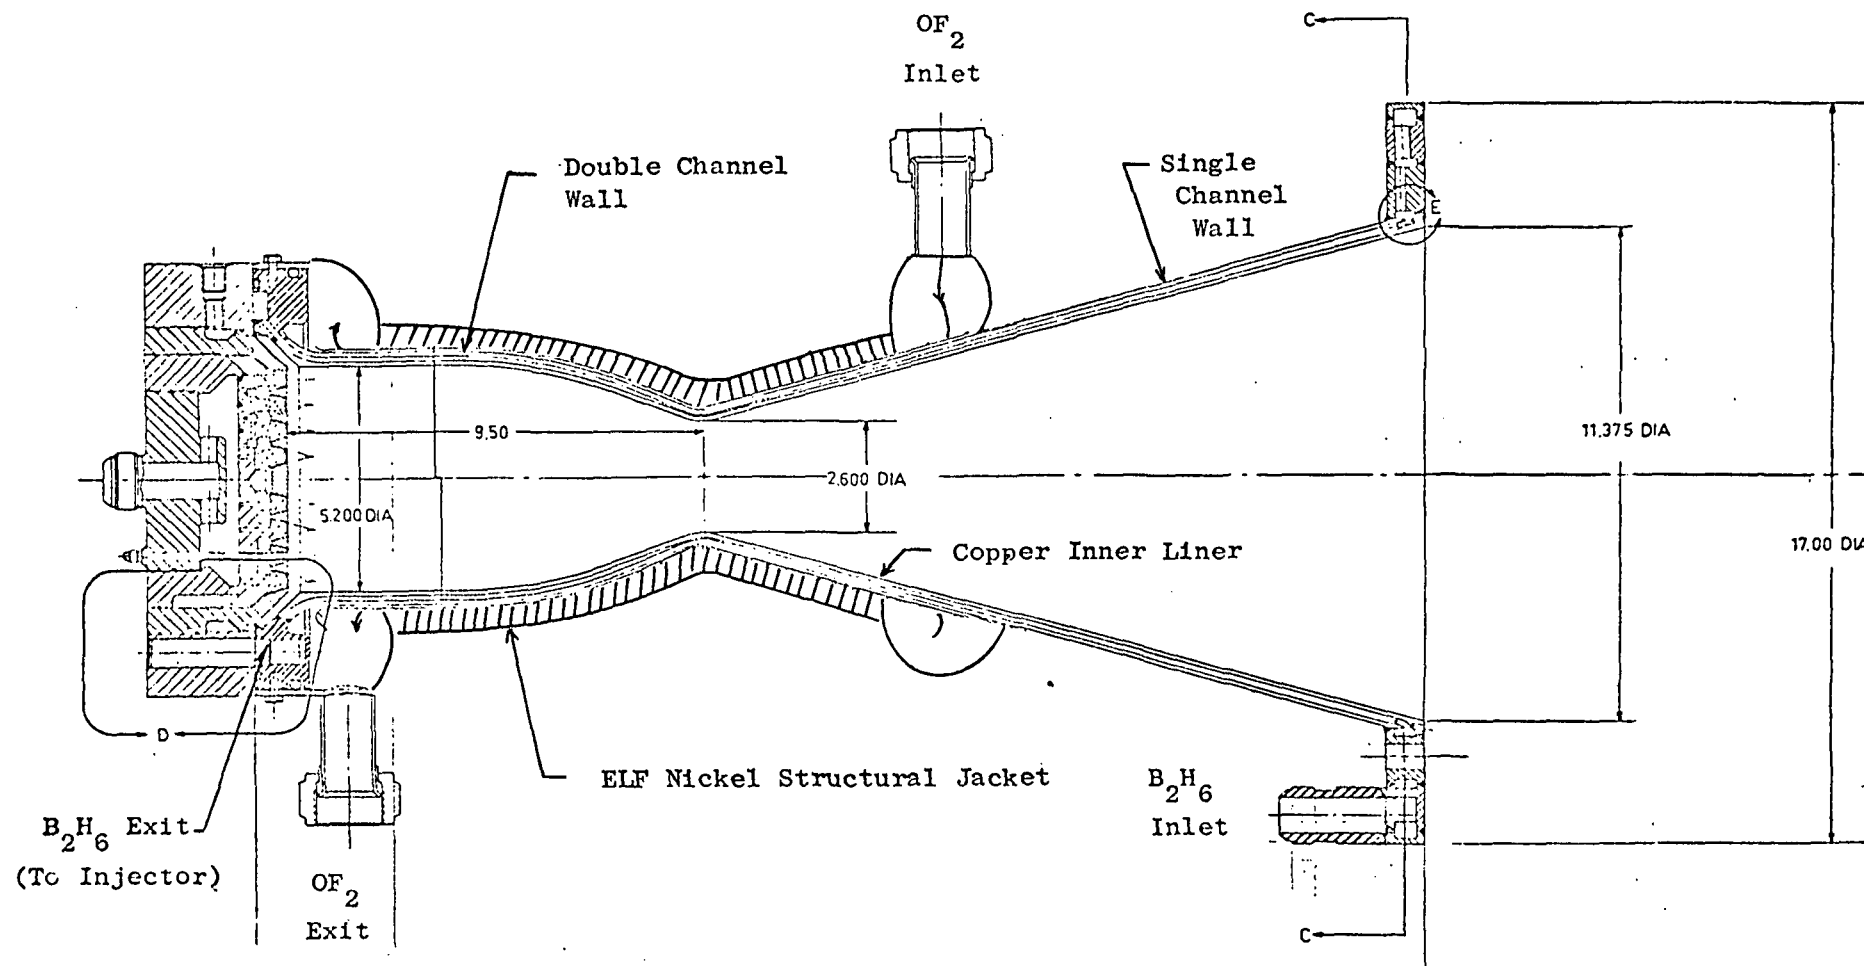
Prototype OF₂/B₂H₆ Cooled Thrust Chamber Assembly (Sketch)
